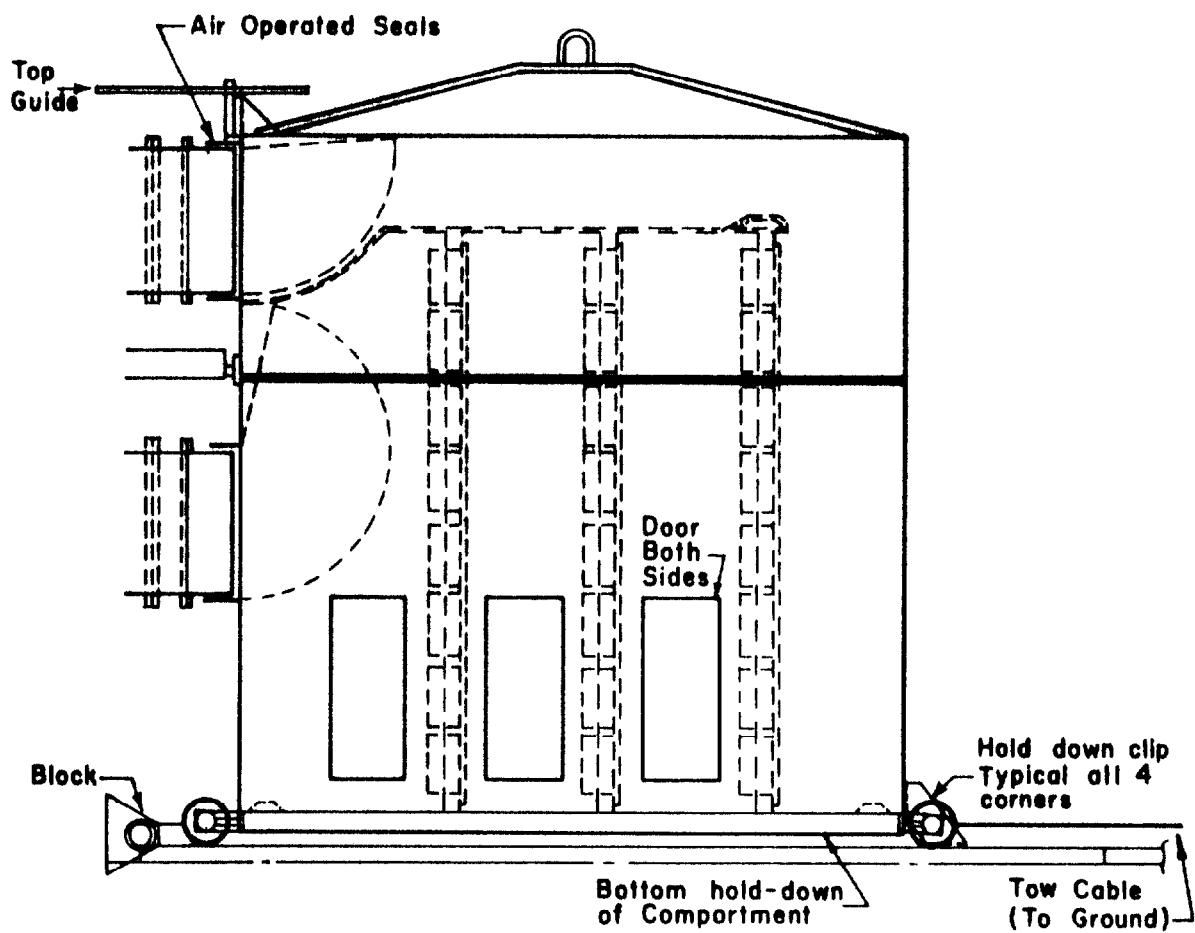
ISOMETRIC DRAWING OF FULL SIZE CARBON FILTER
